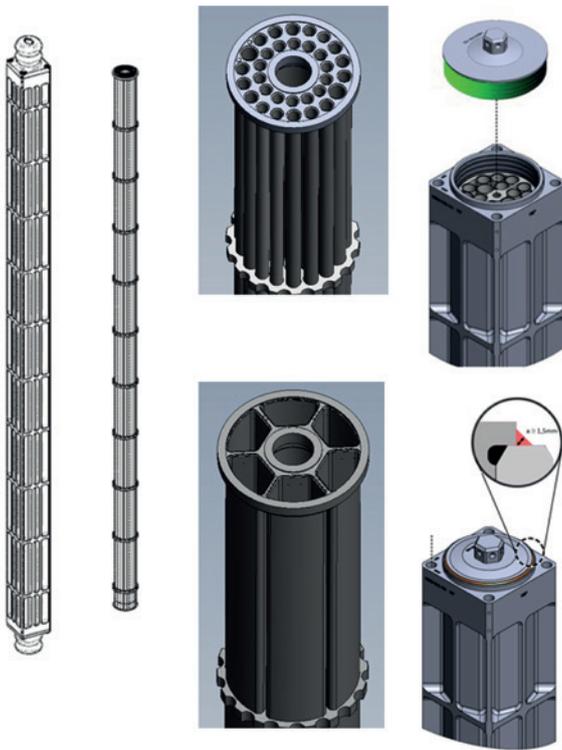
PWR-quiver with head- and foot-piece, inner basket, 32AR (upper-) and 6AR (lower picture), lid of BWR-quiver (upper-), welded lid (lower picture) – (from left to right).
